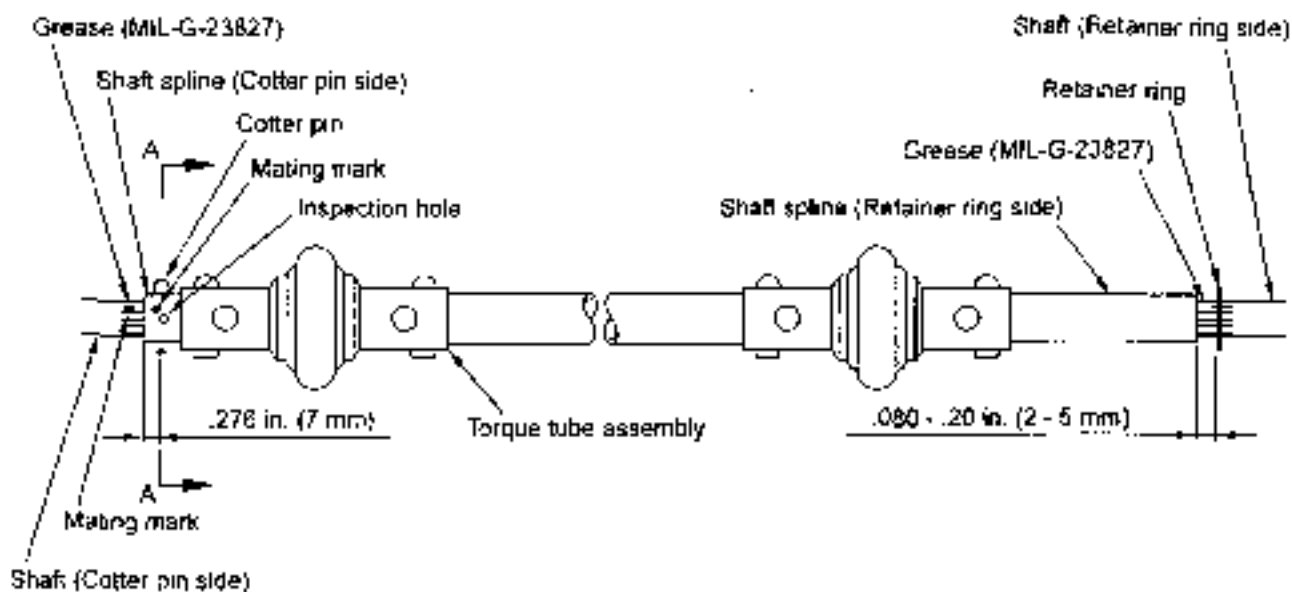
B Installation/Removal of center flap torque tube assembly
